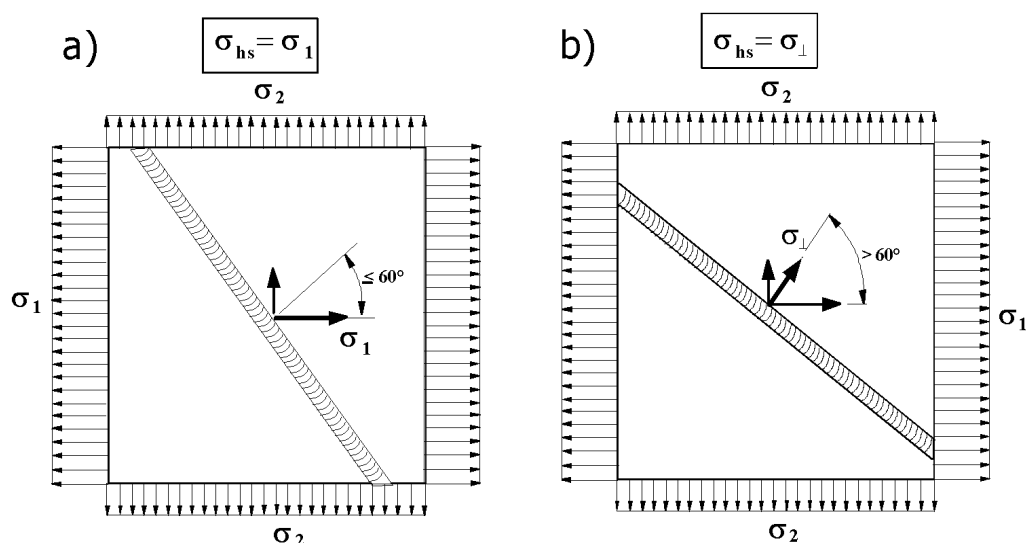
9 Biaxial stress at weld toe
